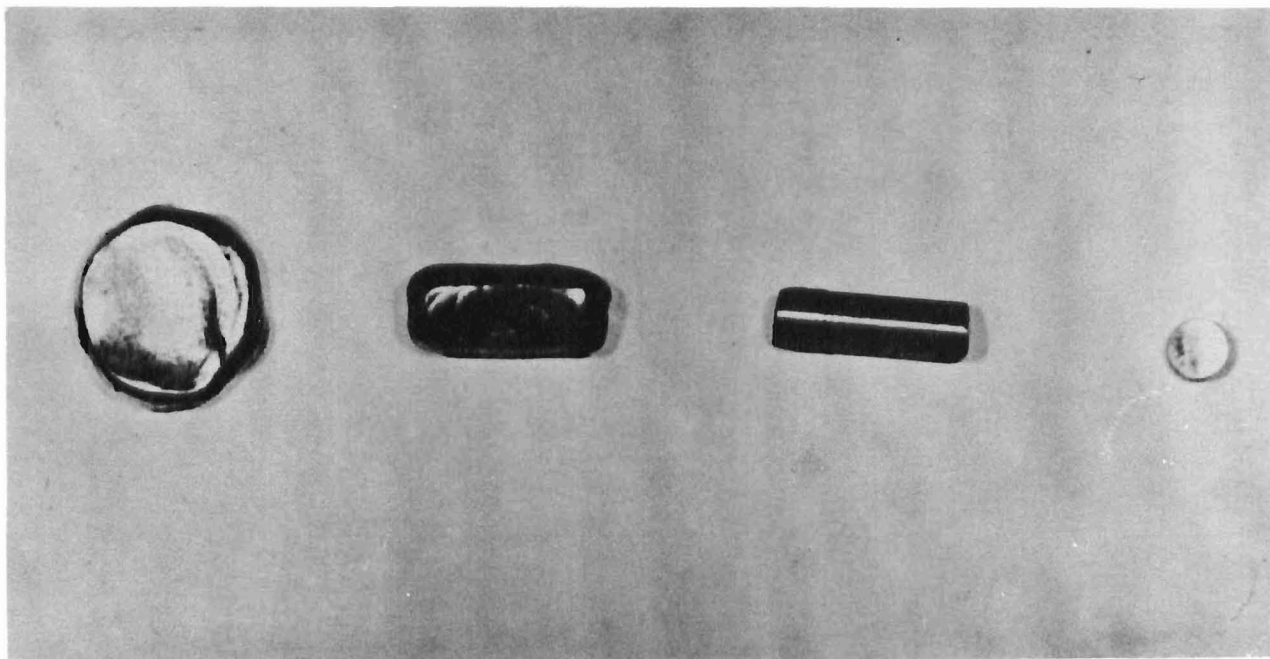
Specimen Preparation for Atmospheric Corrosion Tests. Alloy Button (left) is first prepared by non-consumable arc-melting. It is then arc-melted into a rectangular mold, machined into a cylinder and cut into test specimens. Reduced approximately 30% for reproduction.
